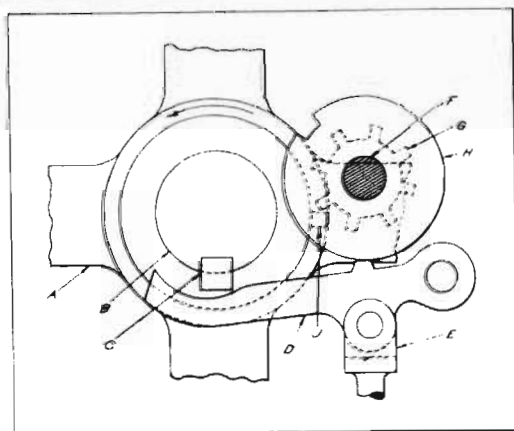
Spring-loaded sliding key *C* shown in its engaged position, with the flywheel *A* rotating crankshaft *B*. When the ram has completed eight strokes, the projection on top of lever *D* will enter the groove in disc *H*, thus disengaging the clutch.
